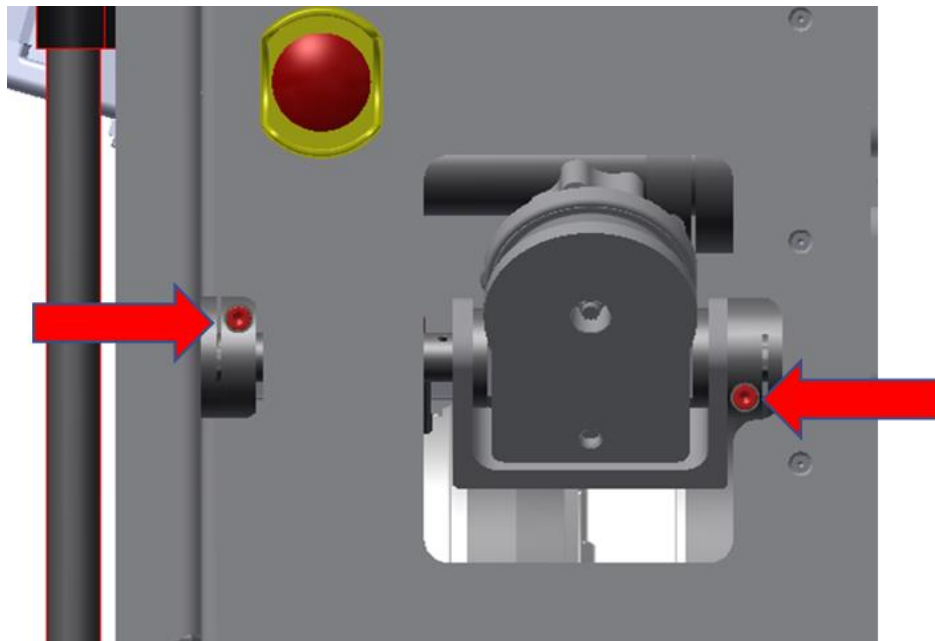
SSCL CABLE OUTLET PULLEY SCREWS
